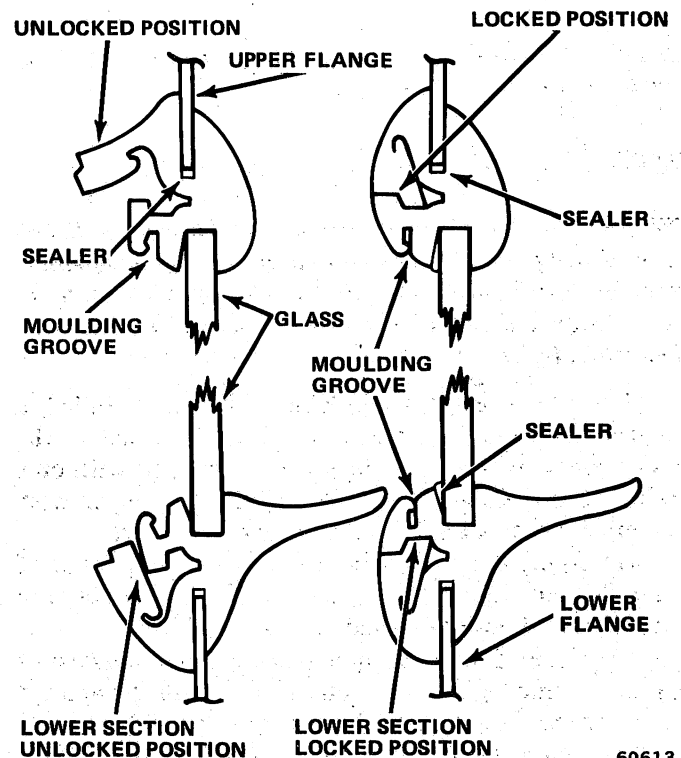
N-2 Windshield Weatherstrip Cross Section—Moulding Removed
